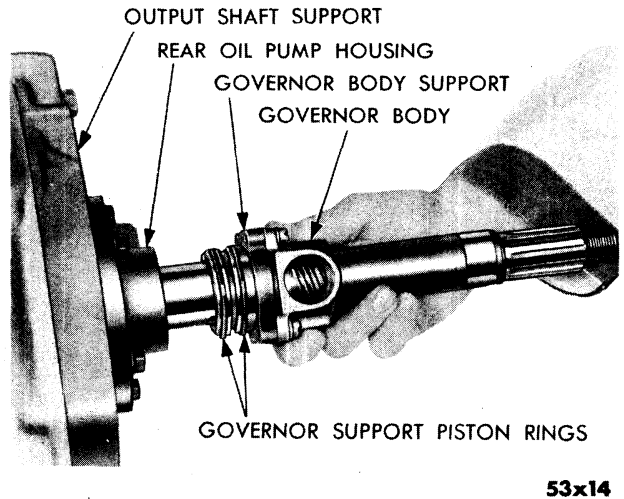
Removal and Installation of Governor Body and Support Assembly
